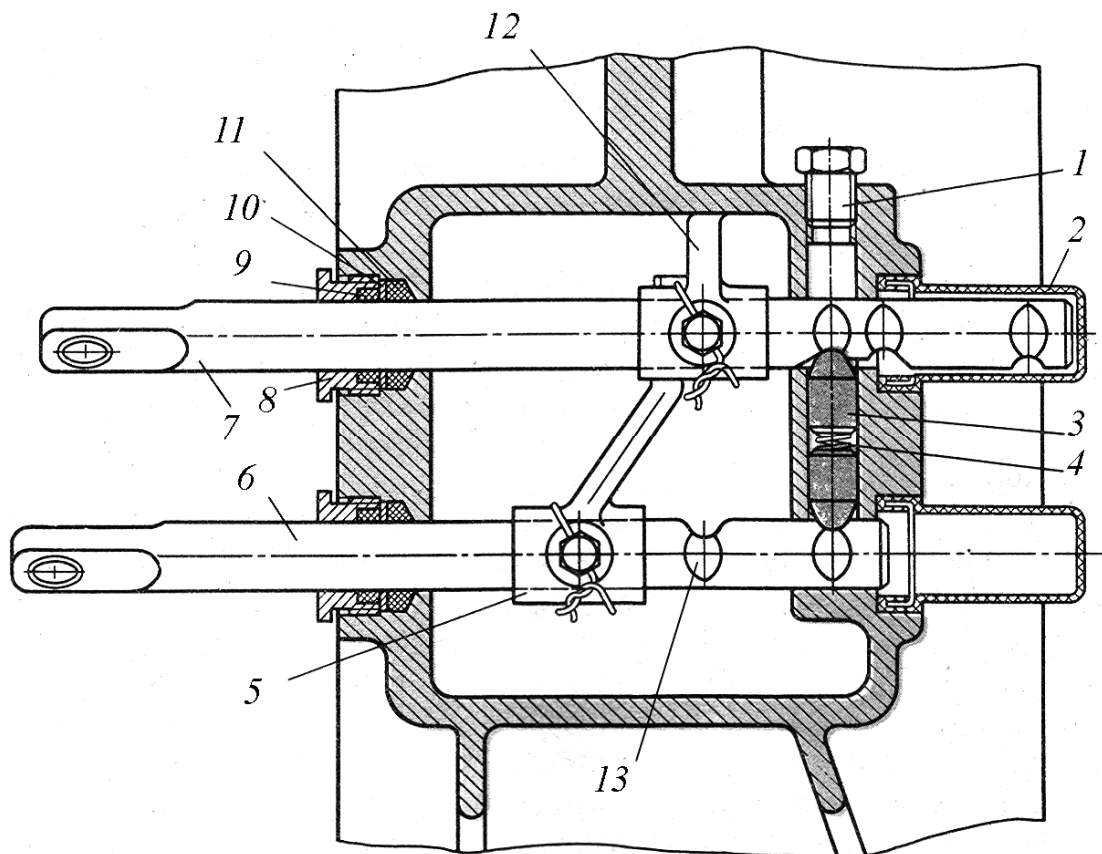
Gearbox control mechanism: 1 - plug; 2 - cap fitting; 3 - dowel; 4 - spring; 5 and 12 - plugs; 6 and 7 - sliders; 8 - inside screw; 9 - ring; 10 - plate; 11 - cumulative; 13 - notches on the slider
